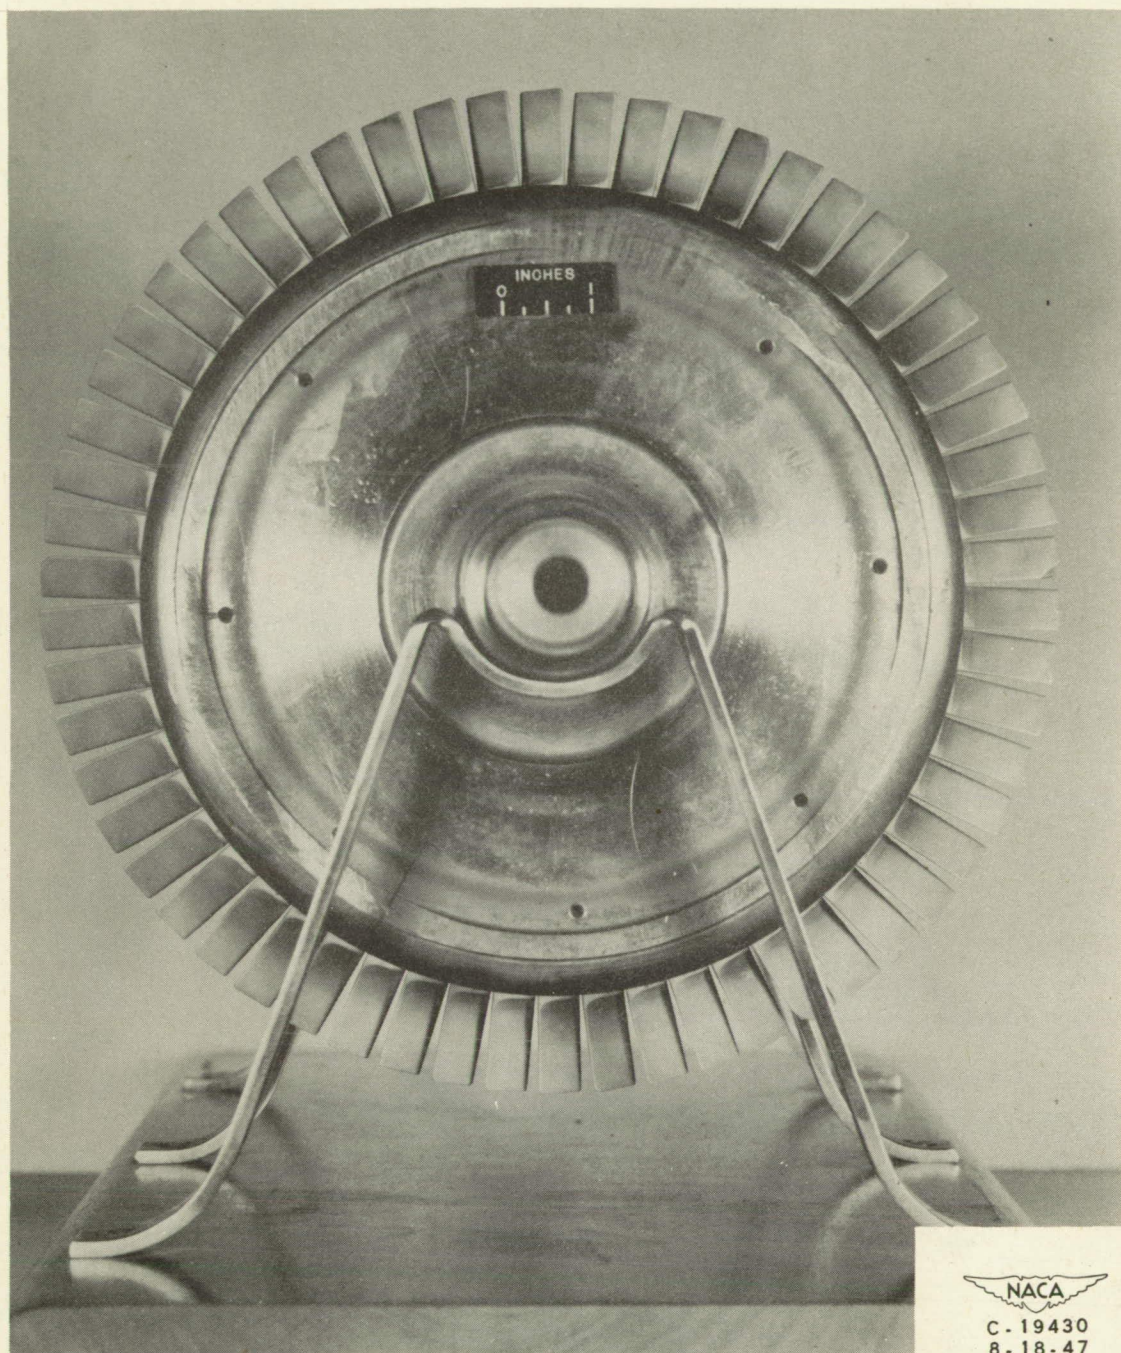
View of entire blade ring shown supported in inner part of assembly fixture after forced shutdown caused by electric power failure to dynamometer. Blade-ring assembly 3.
